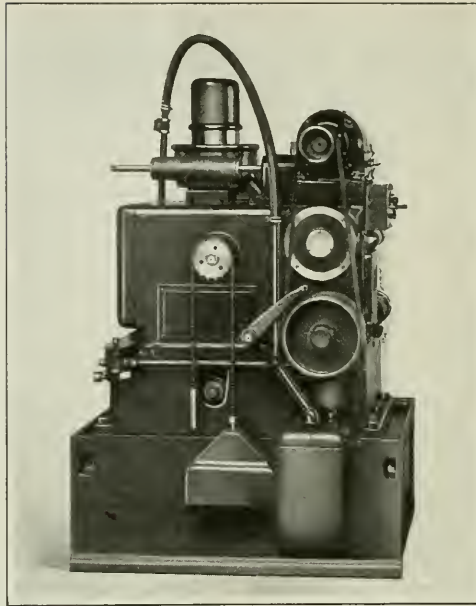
Rear View of the Fellows High-speed Gear Shaper equipped with Individual Motor Drive
